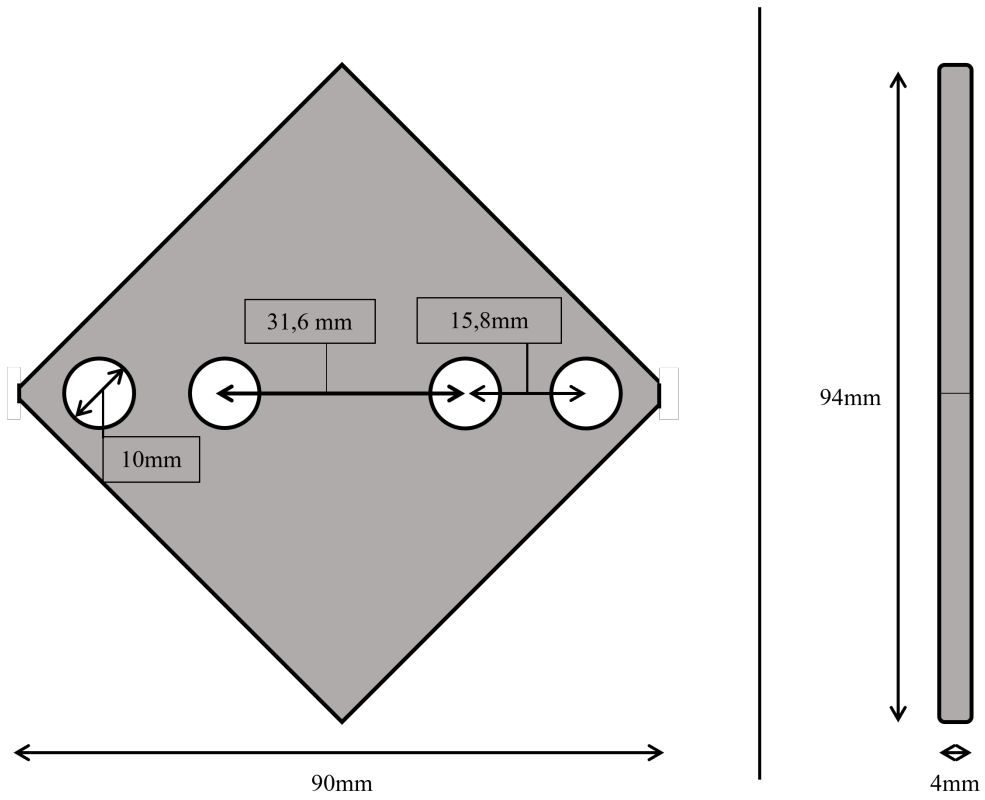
Design and dimensions of the wings. The left part is a front view of the wing, and the right part is the side view.
